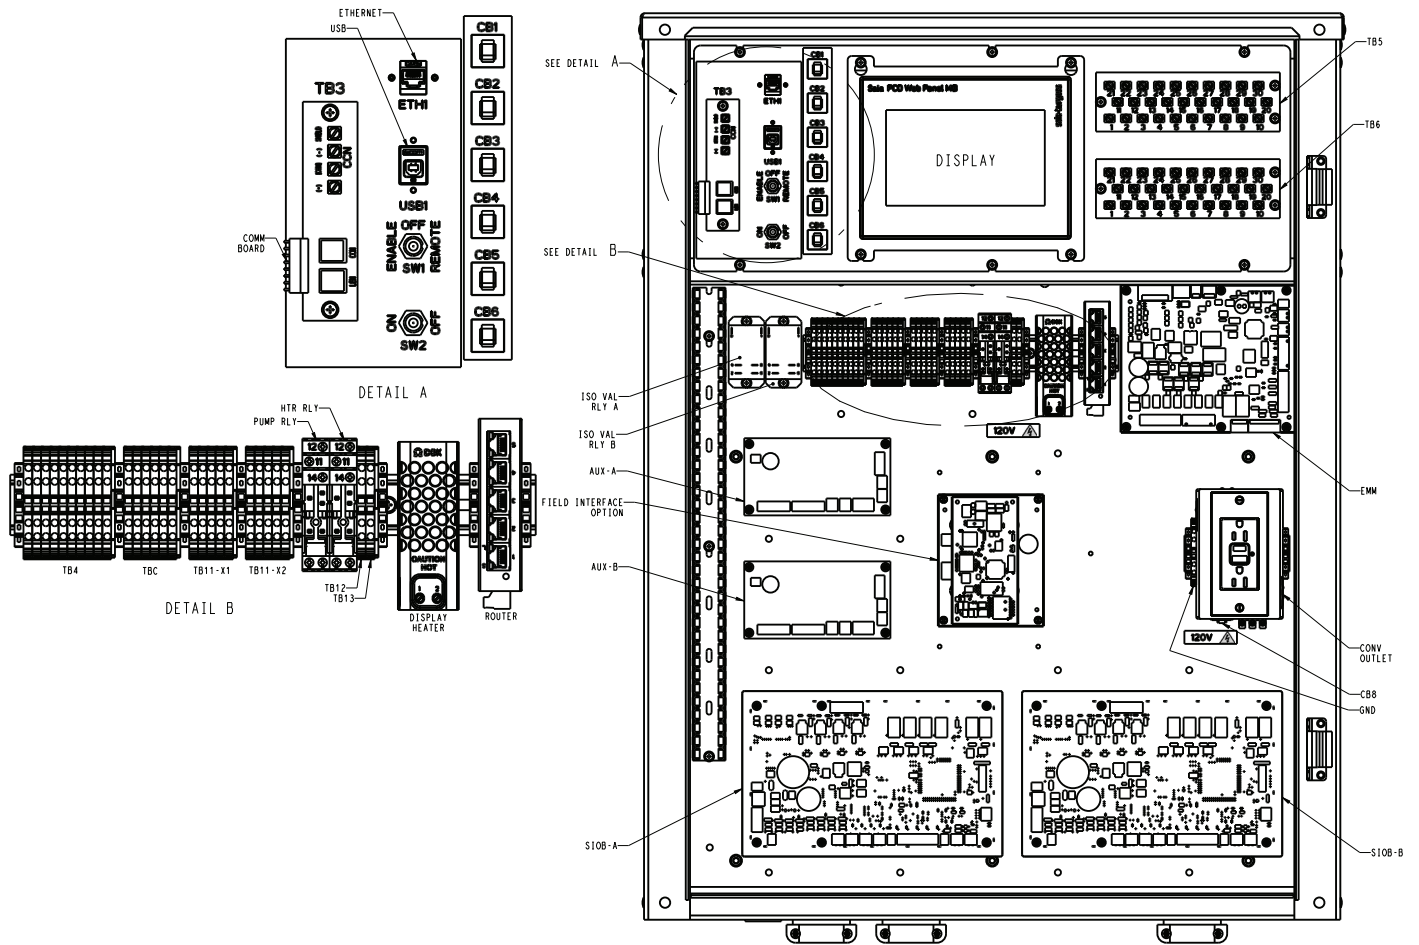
Component Layout Drawing (30XVB140-325 Shown)
